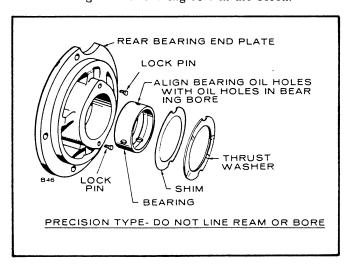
BEARINGS FOR REAR BEARING PLATE
